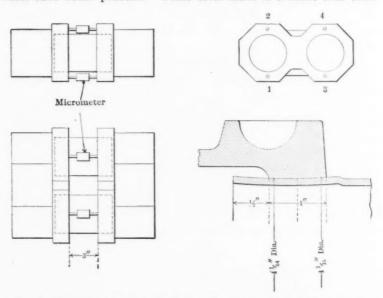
METHOD OF MEASURING SLIP IN TESTS UPON BOILER TUBE JOINTS
